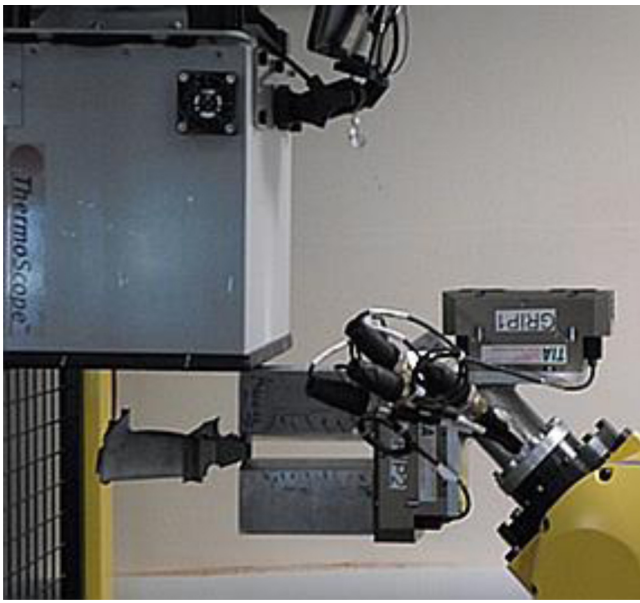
Automated thermographic inspection of a turbine blade supported by a robot (Mehnen et al., 2014).
